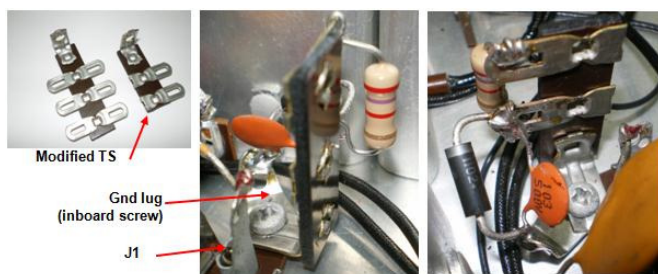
Installed Zener Regulator Mounted on a Vertical Terminal Strip at J1
